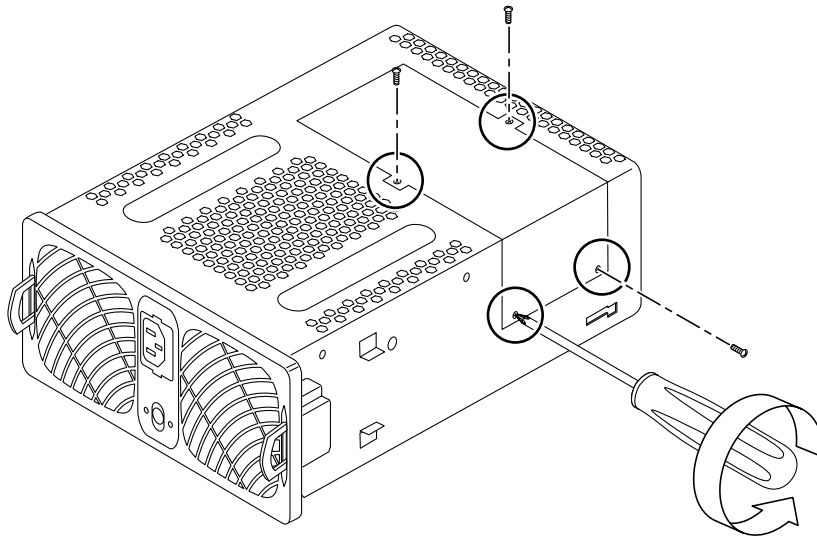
Removing the Screws from the PCU Bottom Panel
